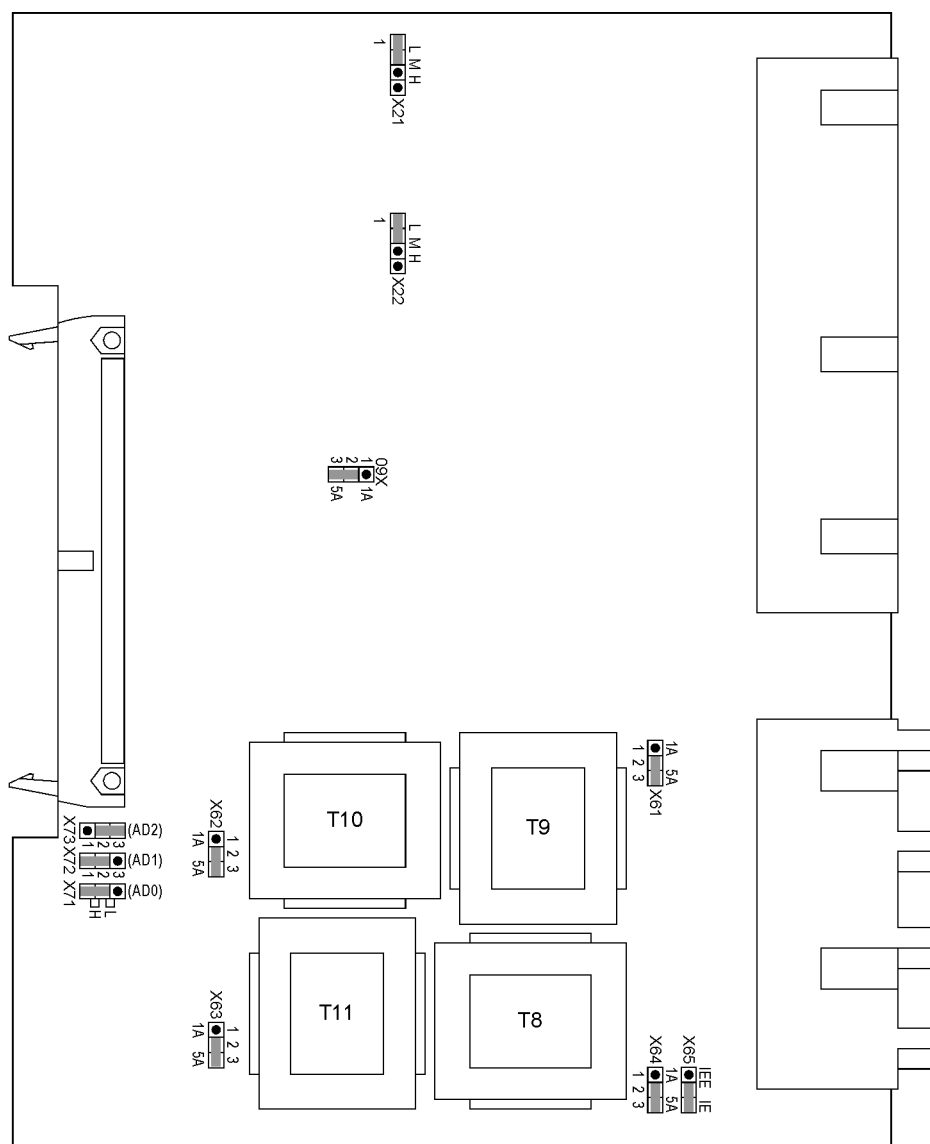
C-I/O-11 input/output board with representation of jumper settings required for checking configuration settings
